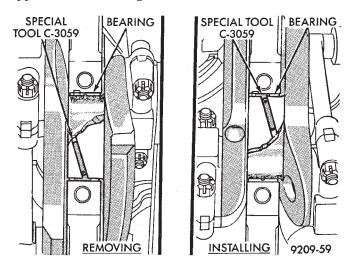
Upper Main Bearing Removal and Installation with Tool C-3059
